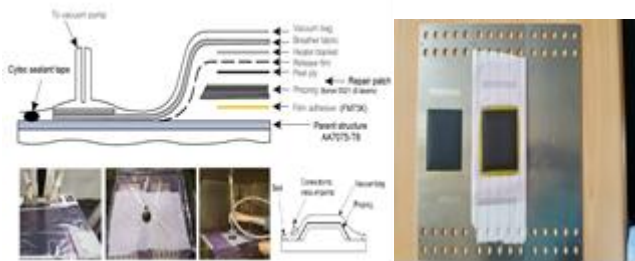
Detail of vacuum bag lay-up and manufactured specimens
